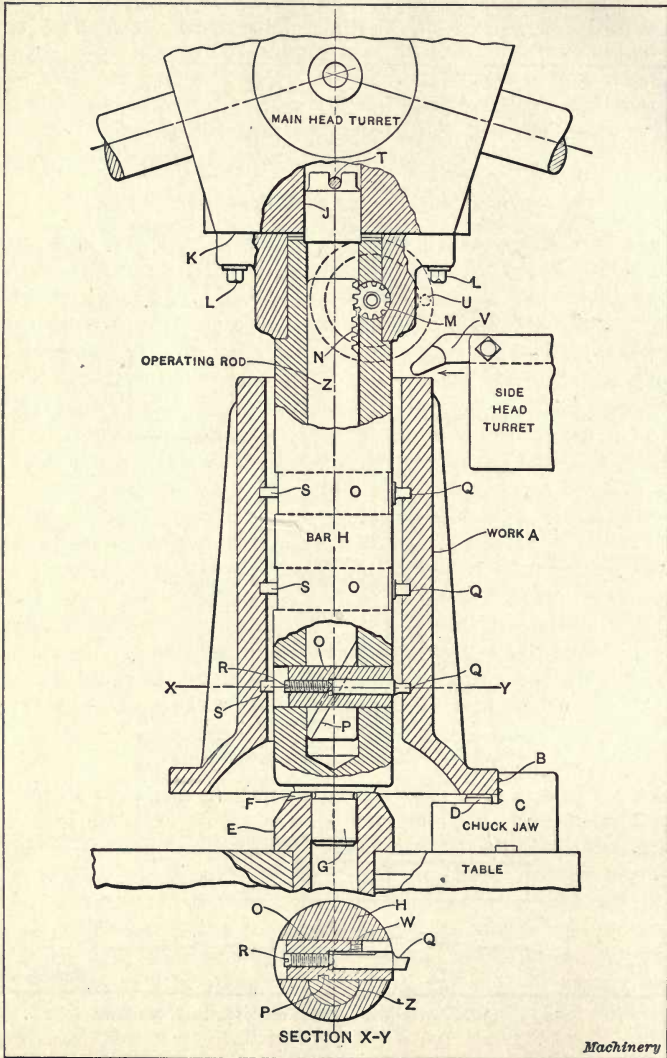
Another Multiple Recessing Tool used in a Vertical Turret Lathe
